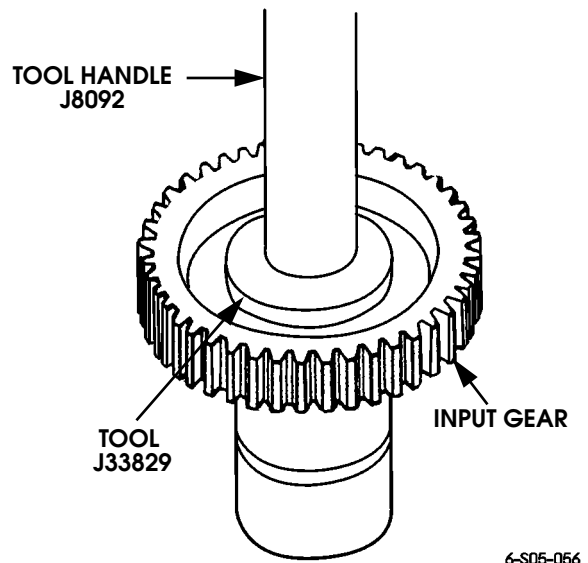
Installing Mainshaft Pilot Bearing In Input Gear
